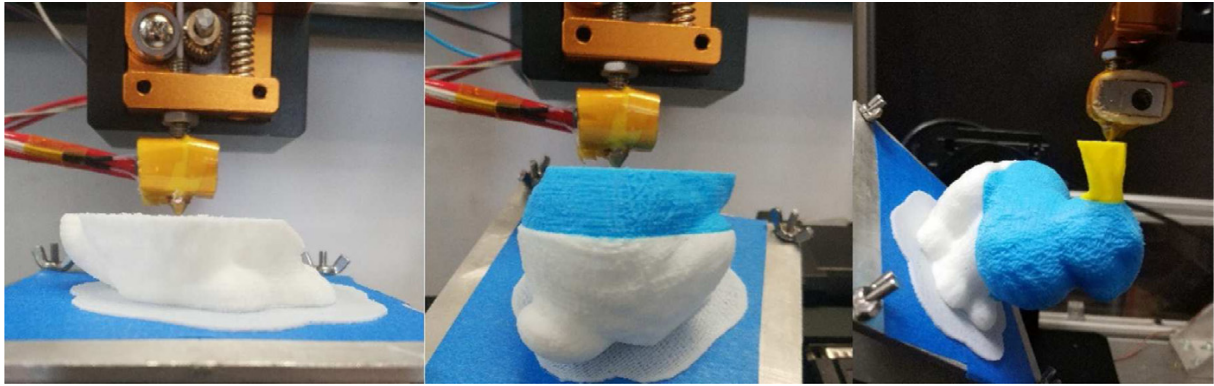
Printing a decomposed bunny with three cutting planes using a 5-axis printer. [83].
